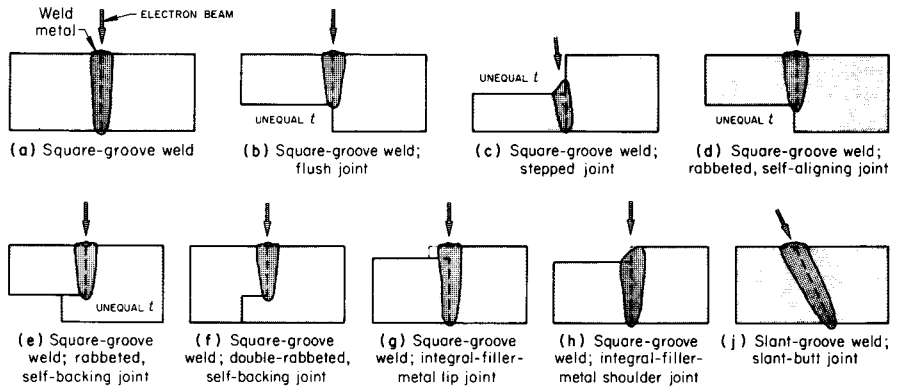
Types of butt joints and welds typically generated by electron beam welding
